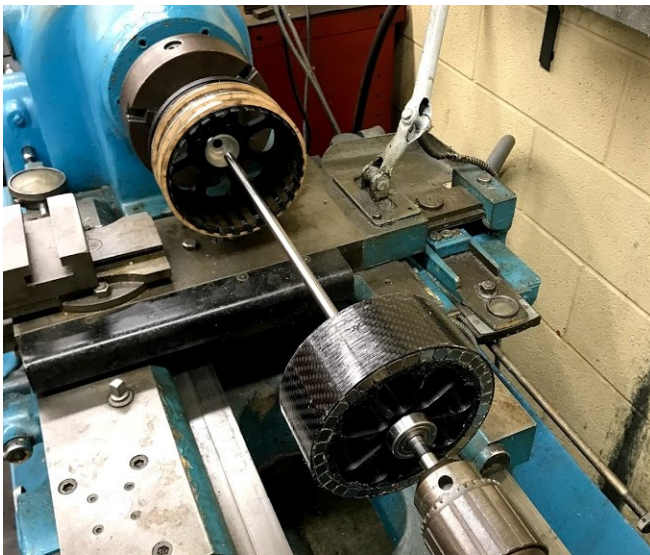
PT-2 sun gear (right) guided into the modulator (left) with temporary guide shaft screwed on to maintain concentricity in assembly.
